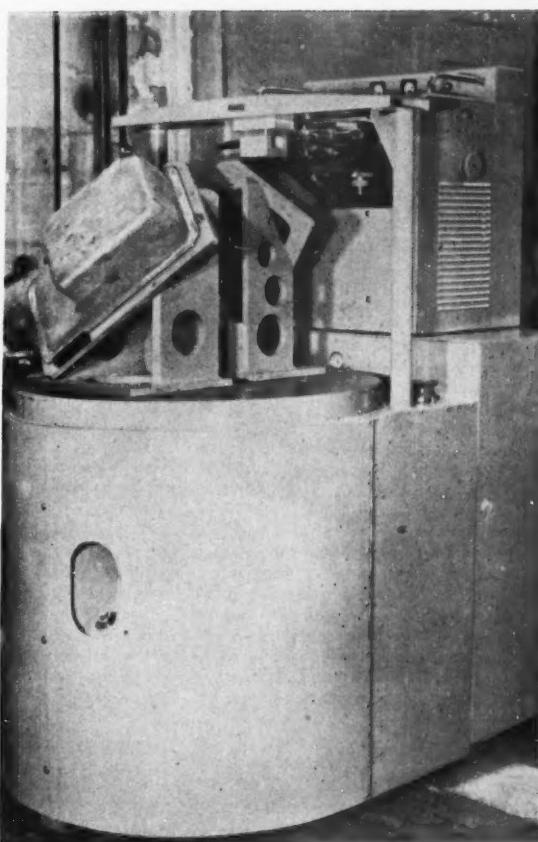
Delapena equipment with semi-automatic hand-loaded brazing fixture for engine sumps
